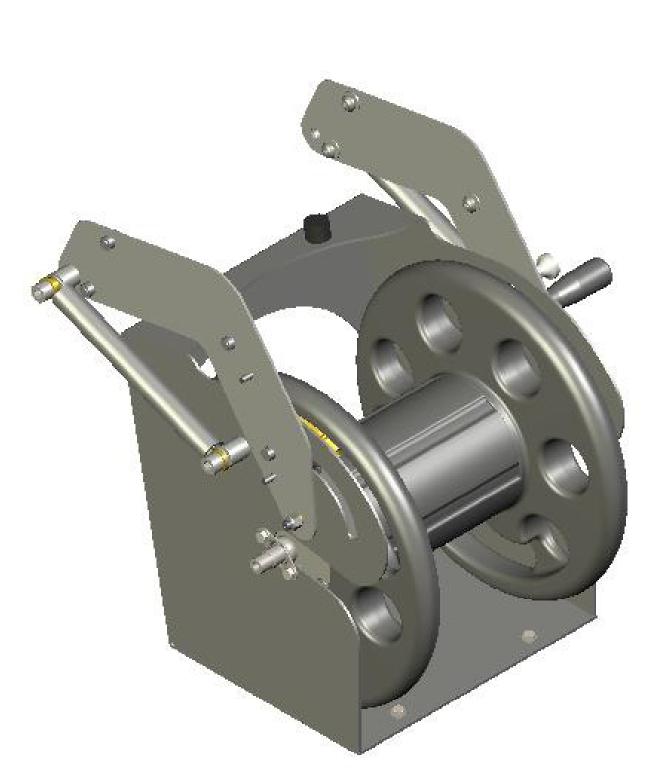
14" (35.6-cm) Diamete Hose Reel Assembly - Parts View 7587 Rev. A
